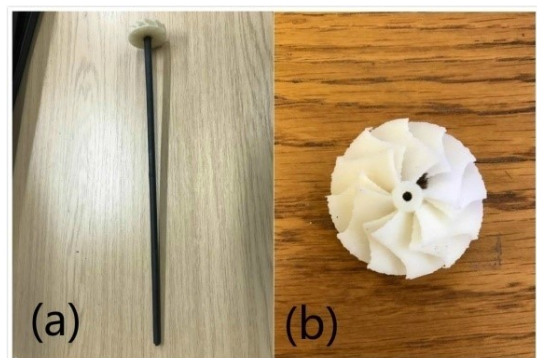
(a) Hardwood rod coated with black thermal plastic tube; (b) 3-D printed plastic impeller.
